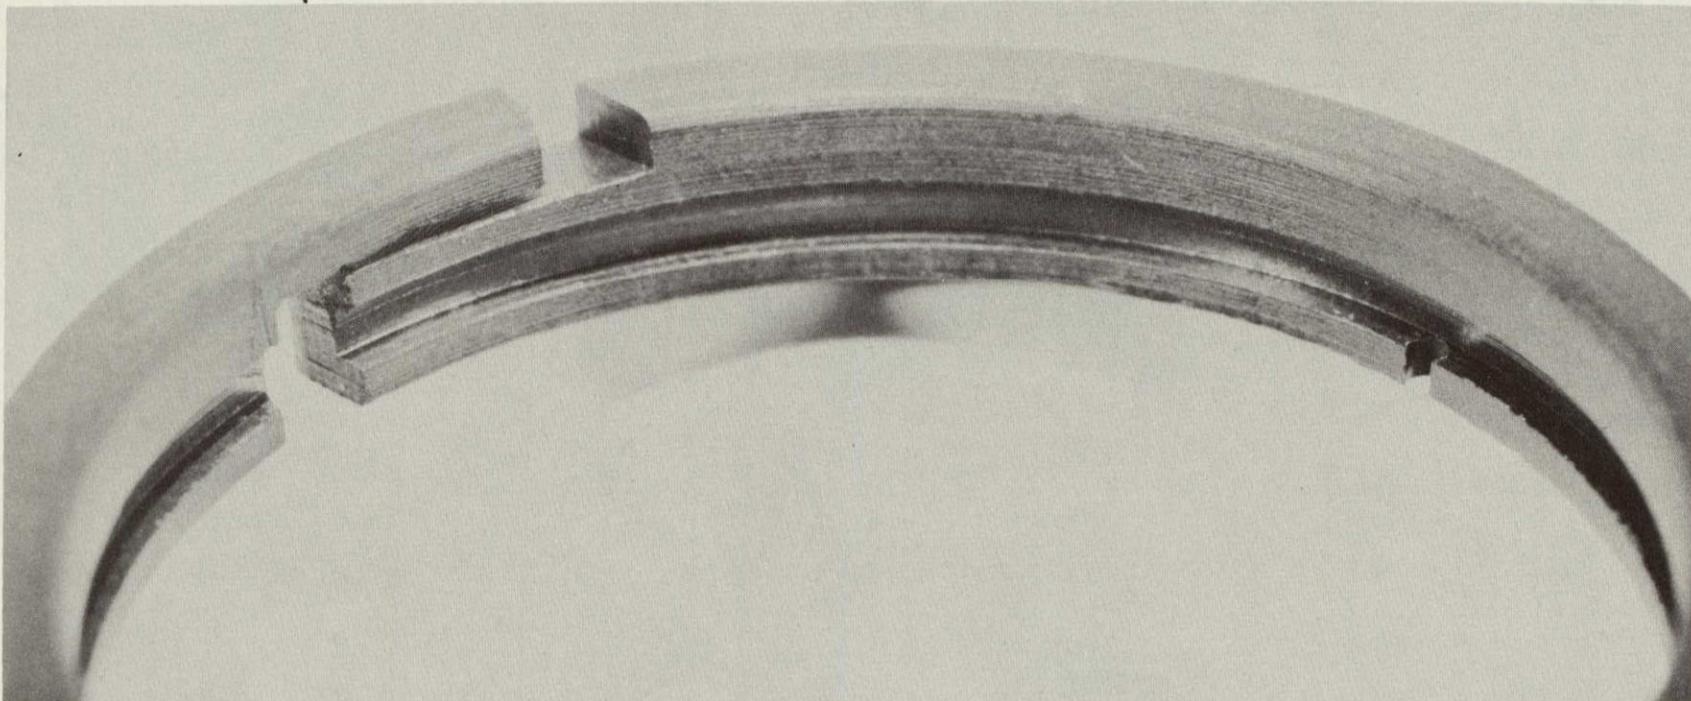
Spiral Groove LOX Seal Piston Ring (A28-0812-12-7456- Rev. C,
